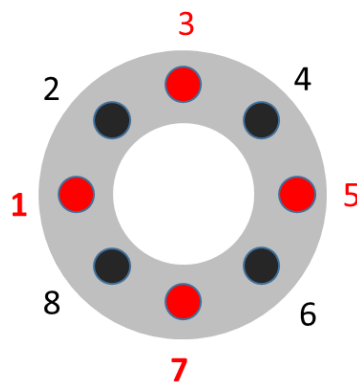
FBG-enabled Bolts with numbers on the flange assembly
